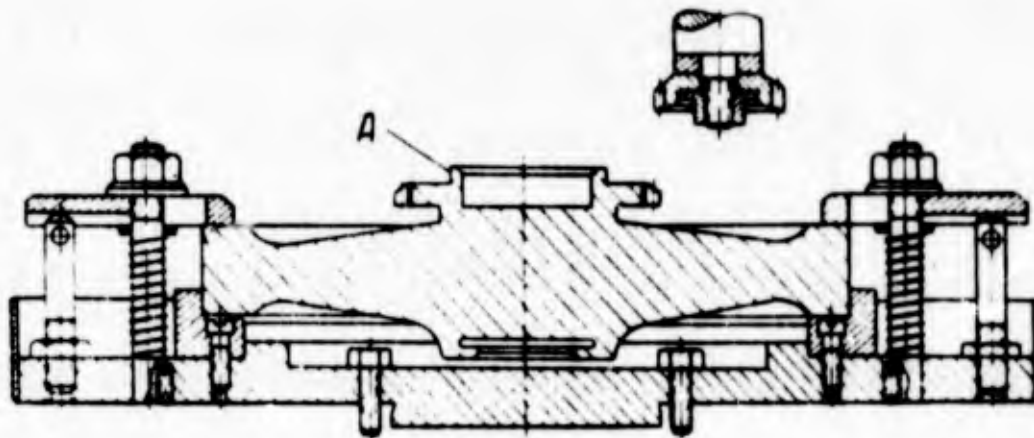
Slotting of flange splines on gear slotting machine.
